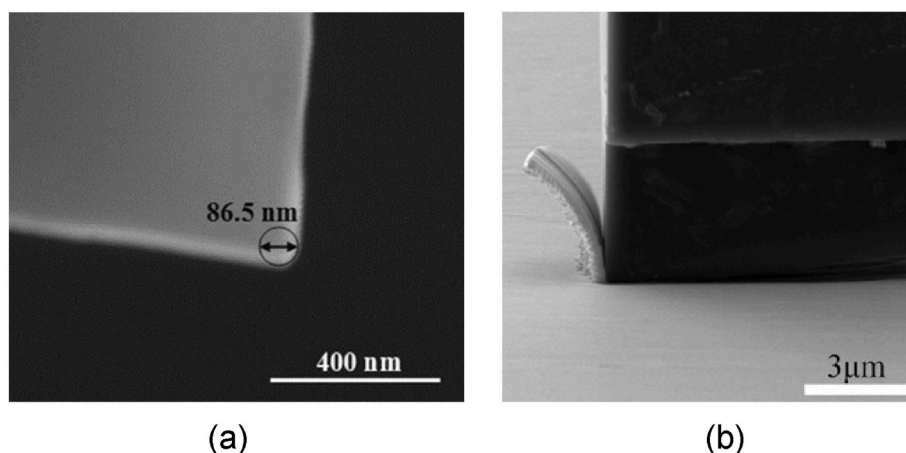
SEM images of (a) customised tool edges and (b) tool-workpiece interaction in micro-cutting [64,83].
